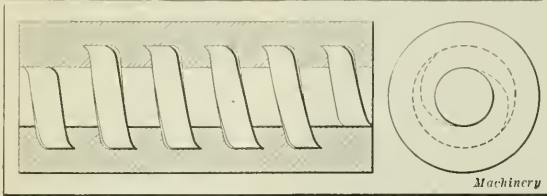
Cross-sectional View of "Nichrome" Retort used in Rotary Gas Furnaces
